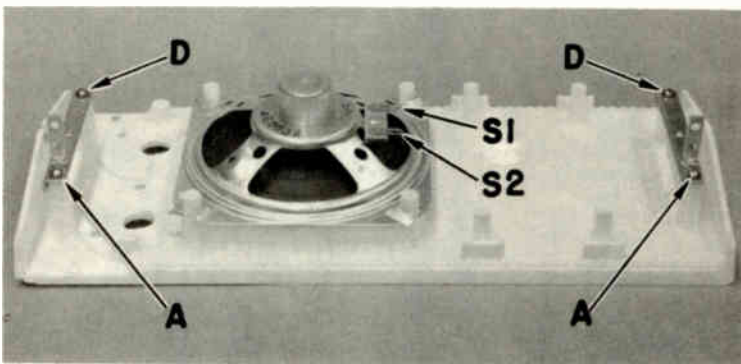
Rear view of front panel with support brackets and speaker mounted.
